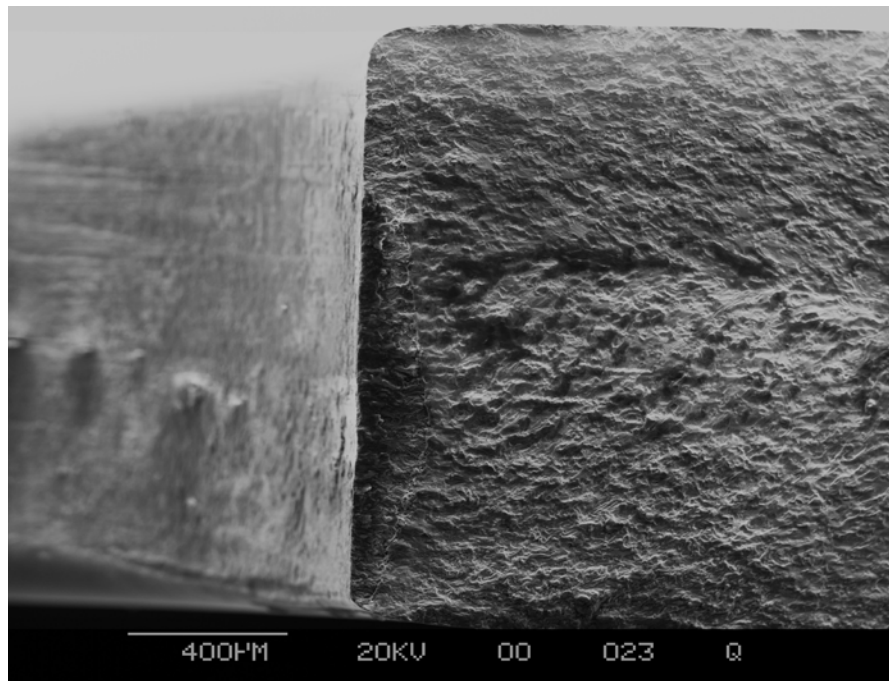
Fracture surface of specimen 14 showing crack initiation area
